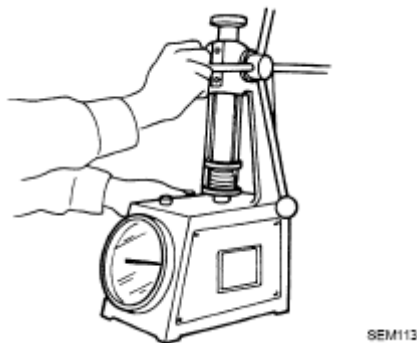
Checking Valve Spring Dimensions And Valve Spring Pressure Load
